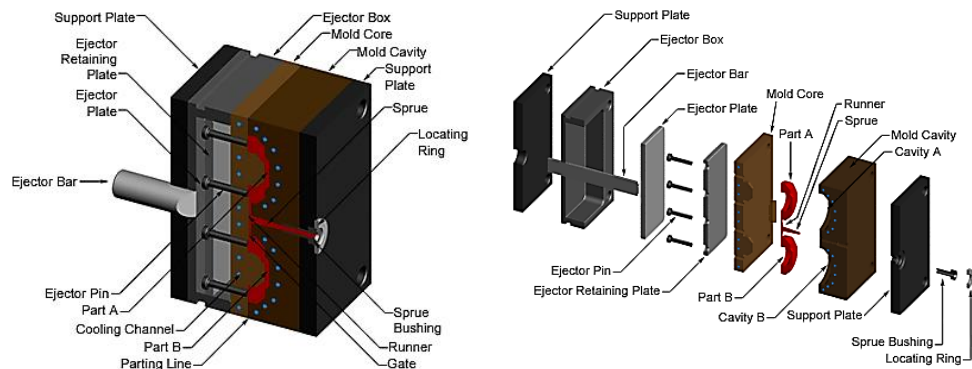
Showing mould closed and mould - exploded view (www.custompartnet.com/wu/InjectionMolding).
